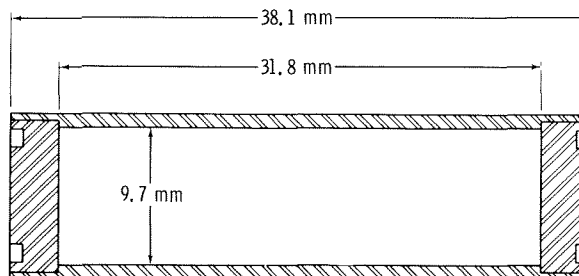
Mild steel (type 1015) ampoule assembly for type B specimen capsules.
